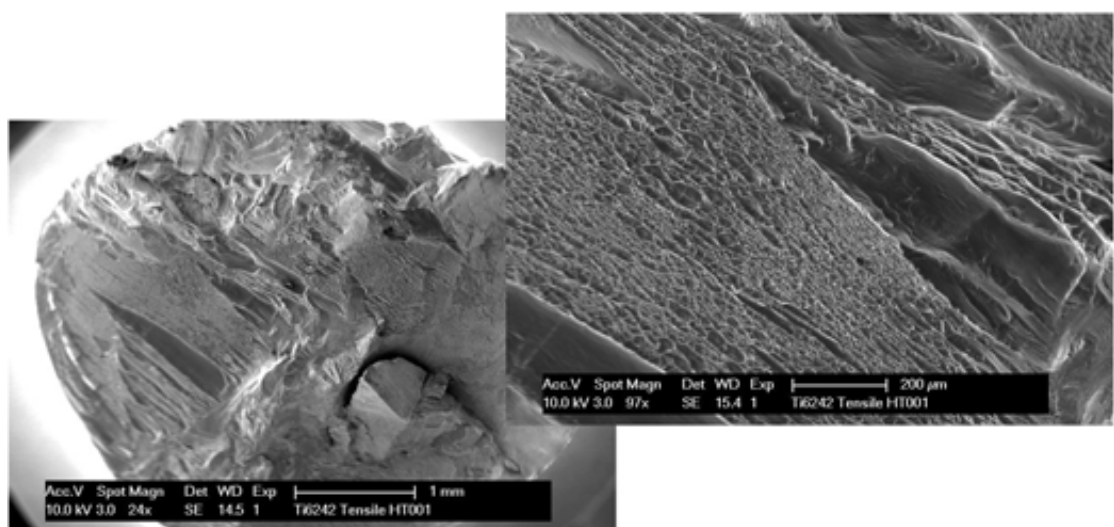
Ti6242 tensile specimen HT001 fracture surface
